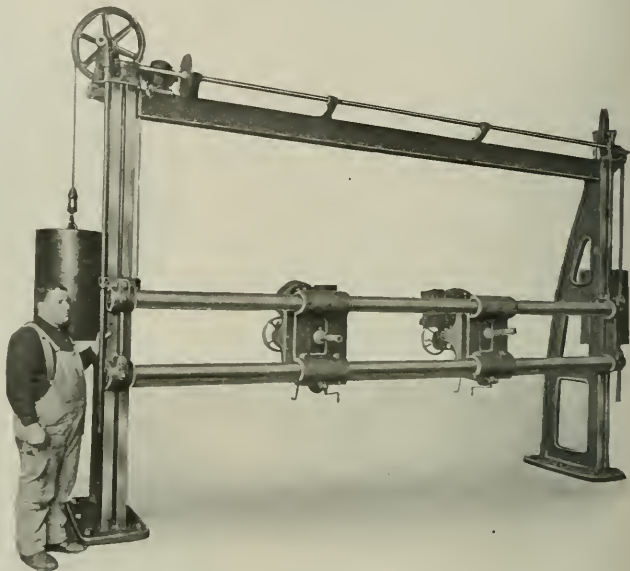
Dallett Motor-driven Drill for Rivet Holes in Boiler Shells.
